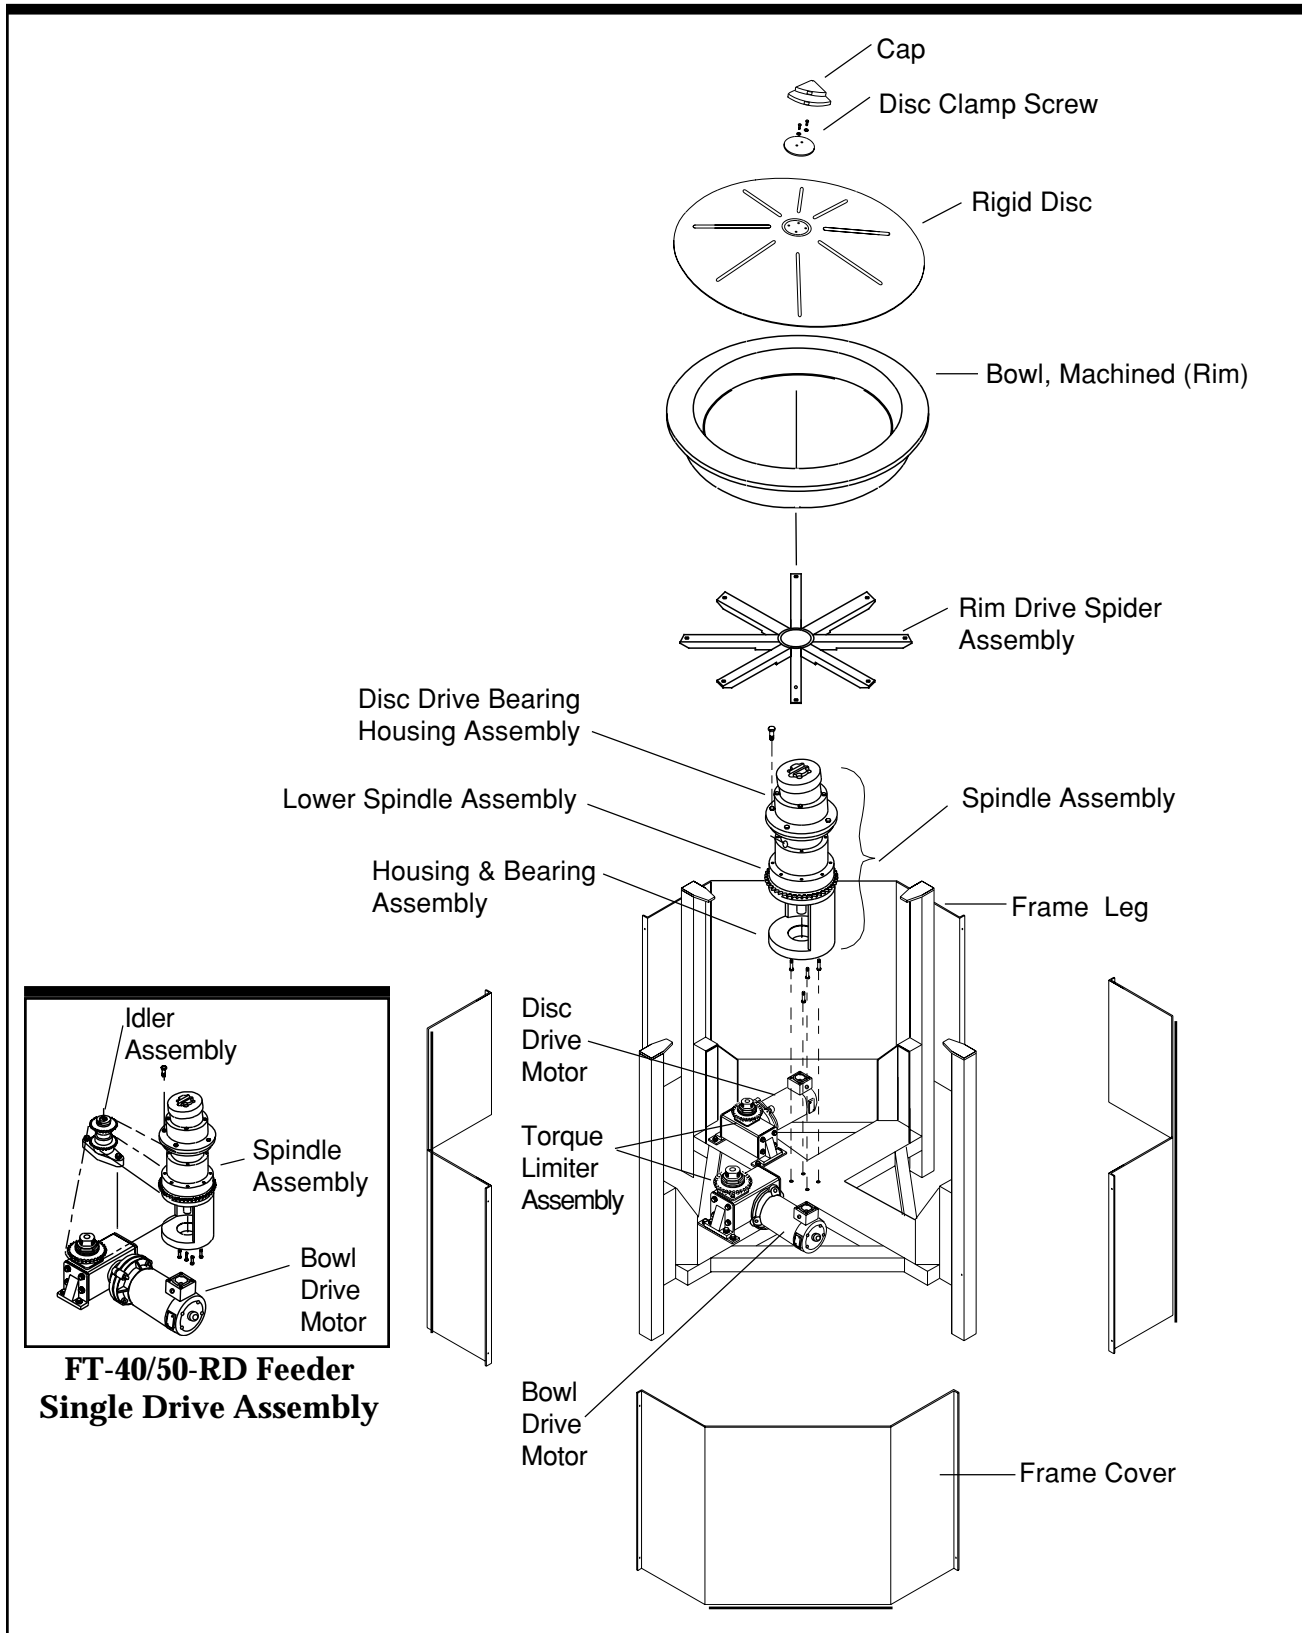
FT-40/50-RD Feeder (Dual Drive) : Overall Exploded View
